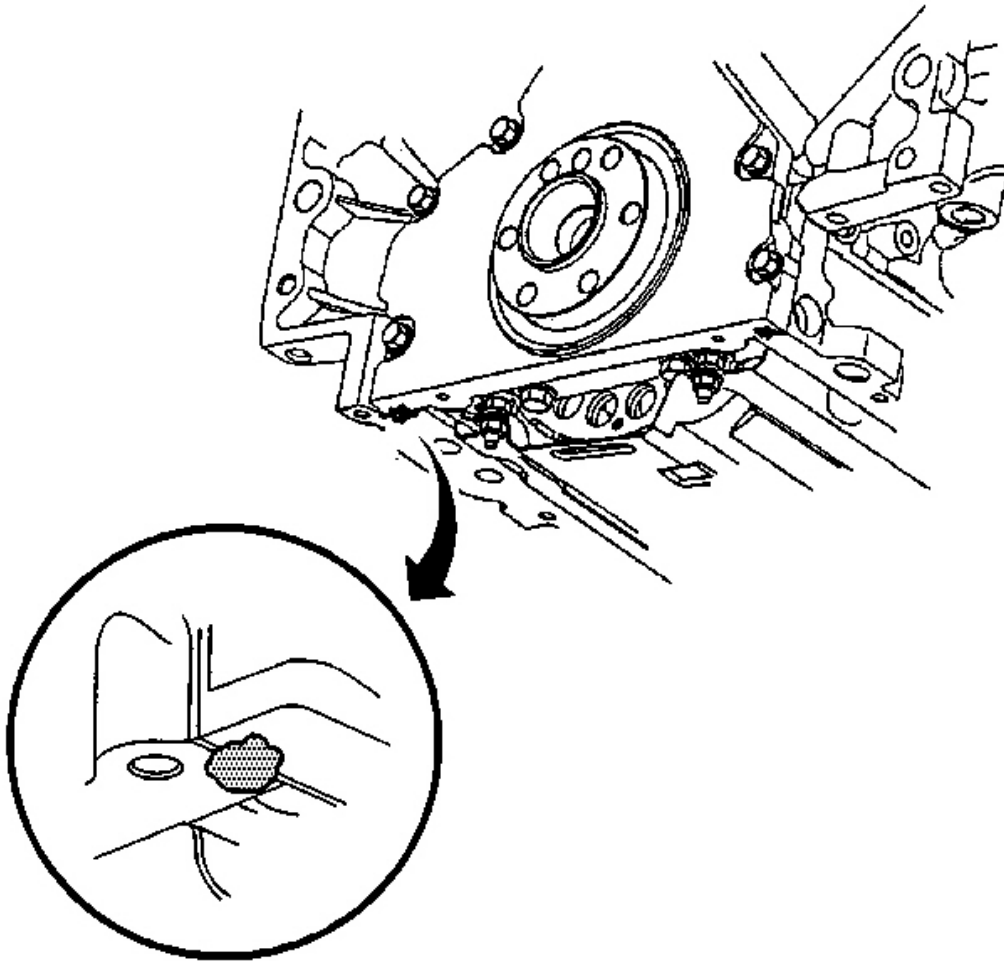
View Of Sealant Applied To Rear Oil Pan-To-Engine Block Junction
